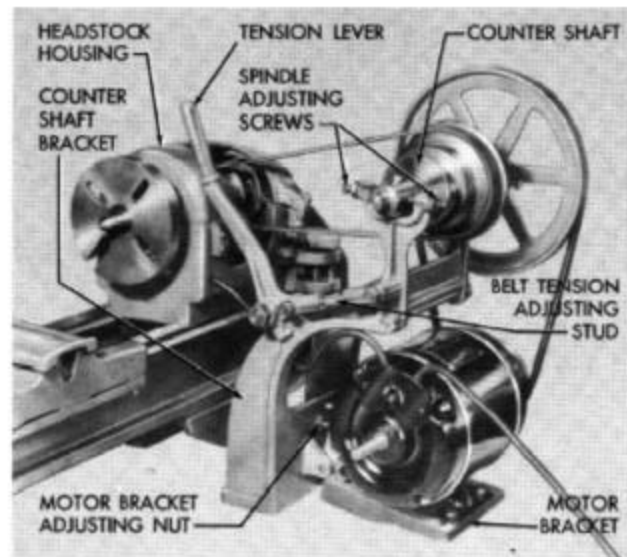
HEADSTOCK AND COUNTERSHAFT BRACKET
